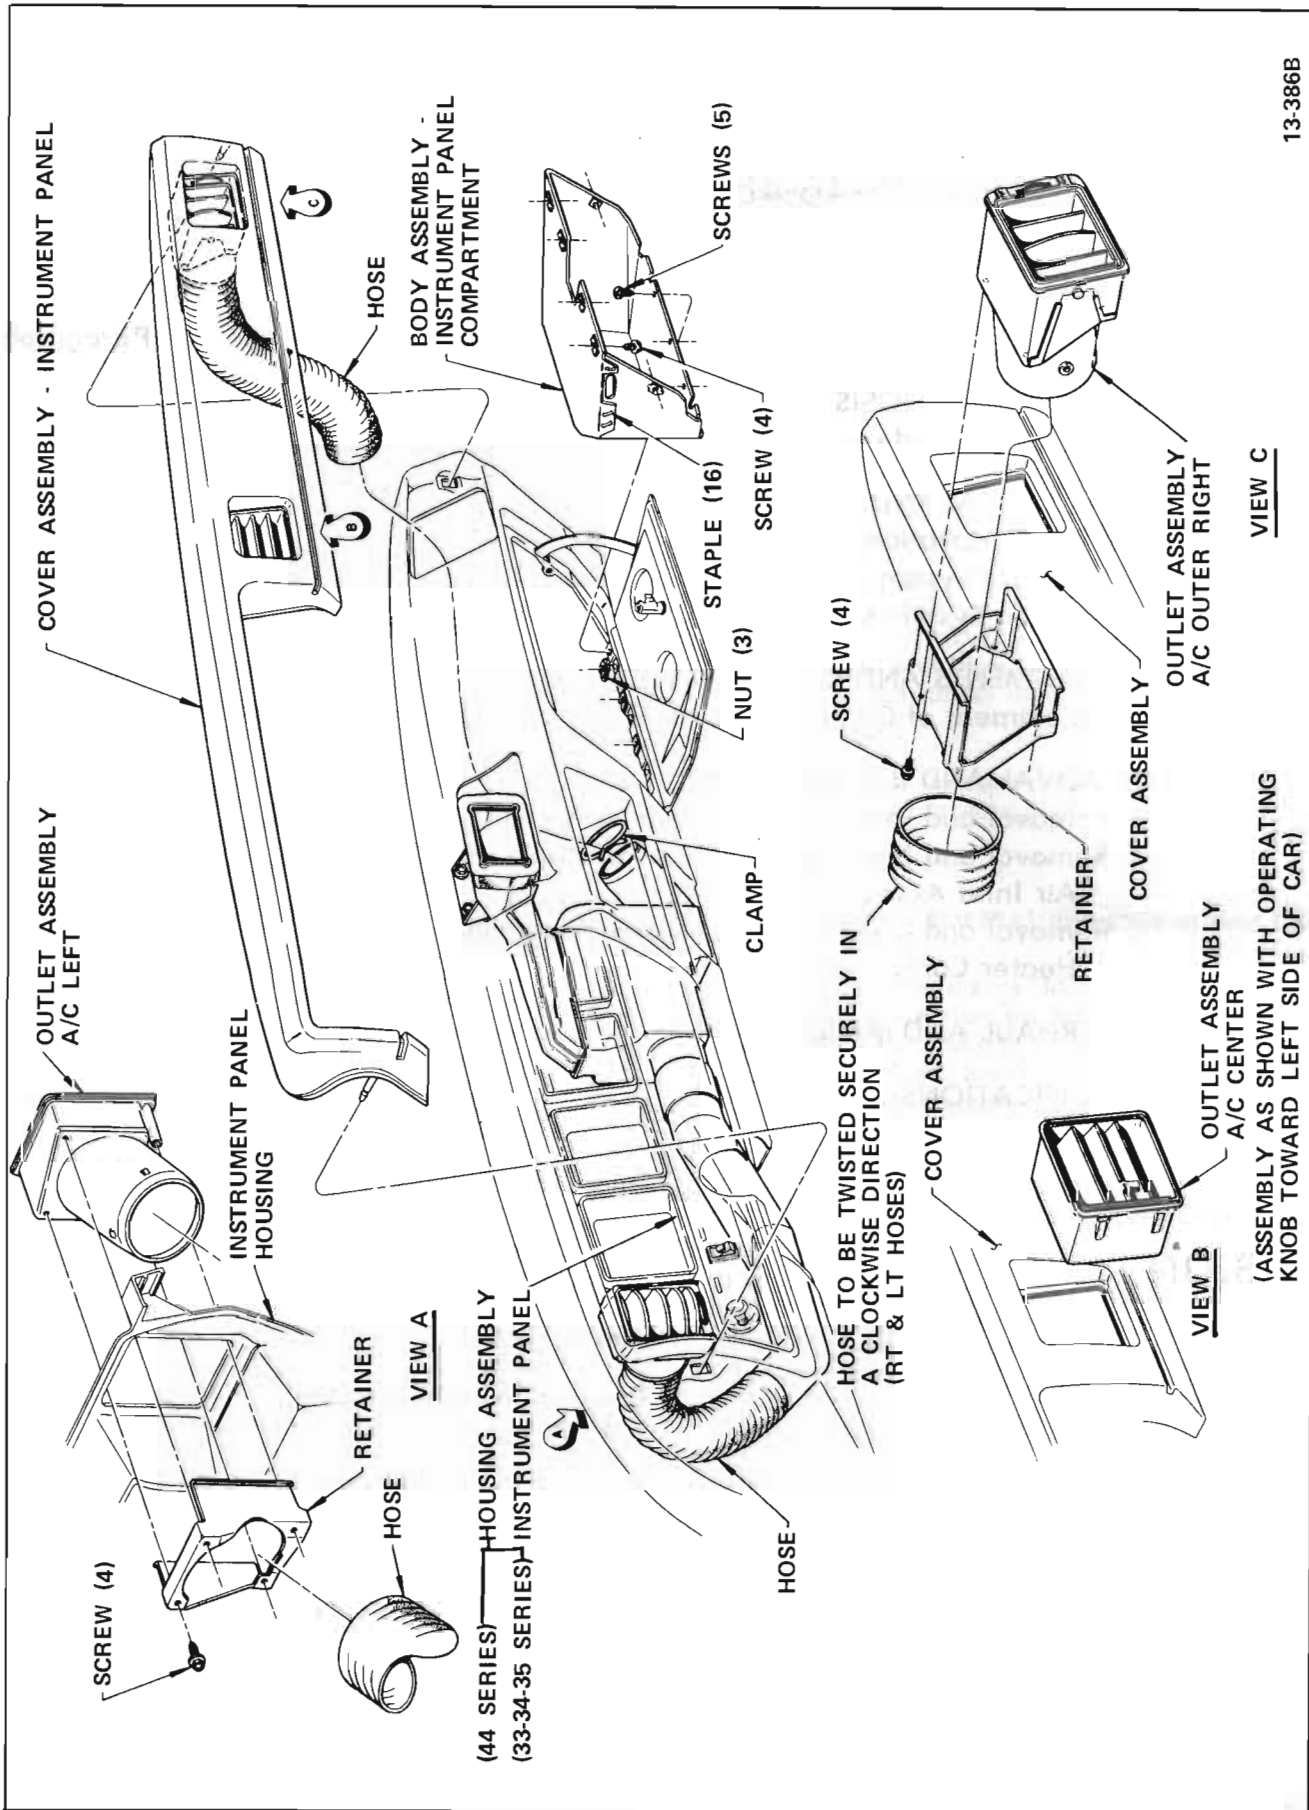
43-44000 Series Instrument Panel Outlet Assembly
